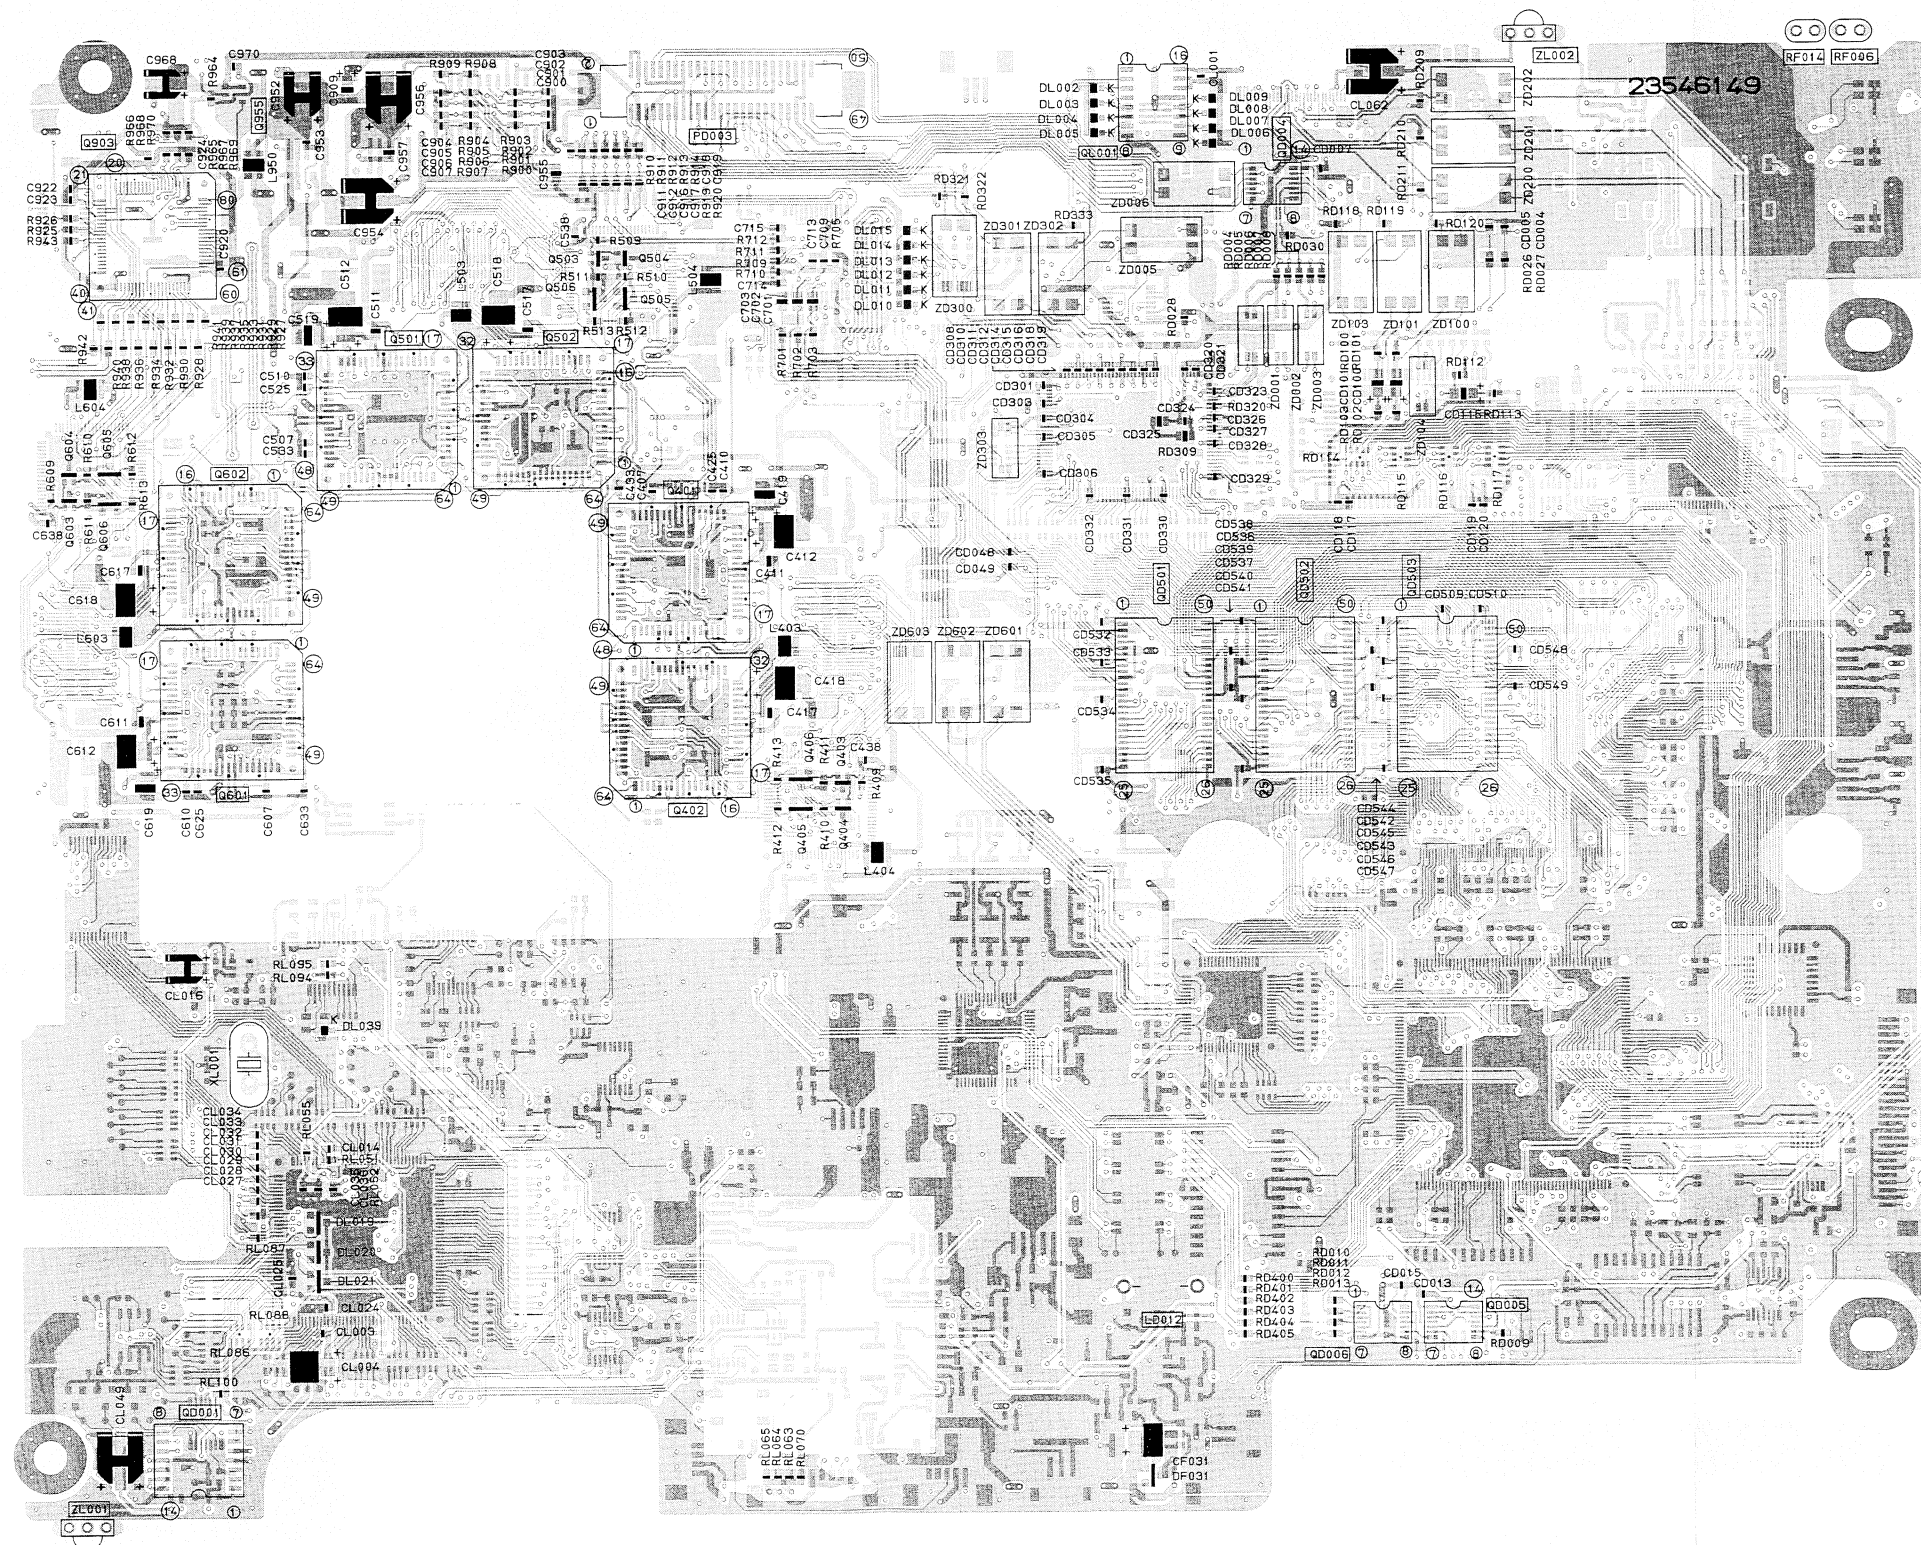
U001 Main PC Board (Bottom Side)
